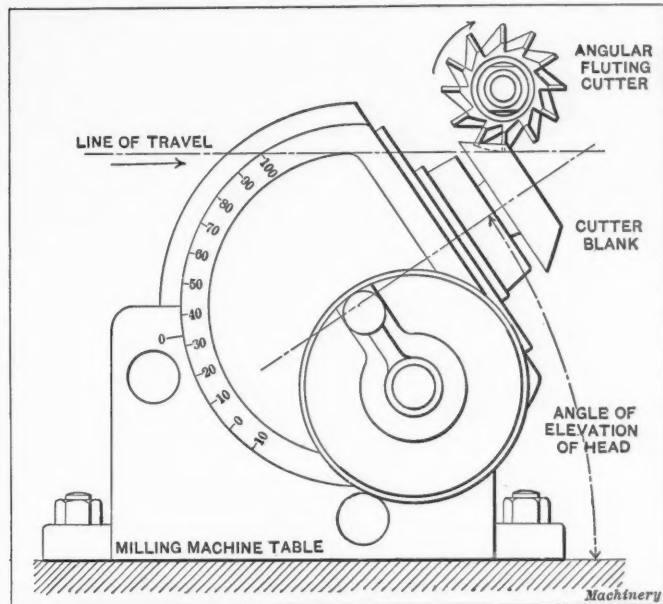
Dividing Head set for Milling Teeth in Angular Cutter
